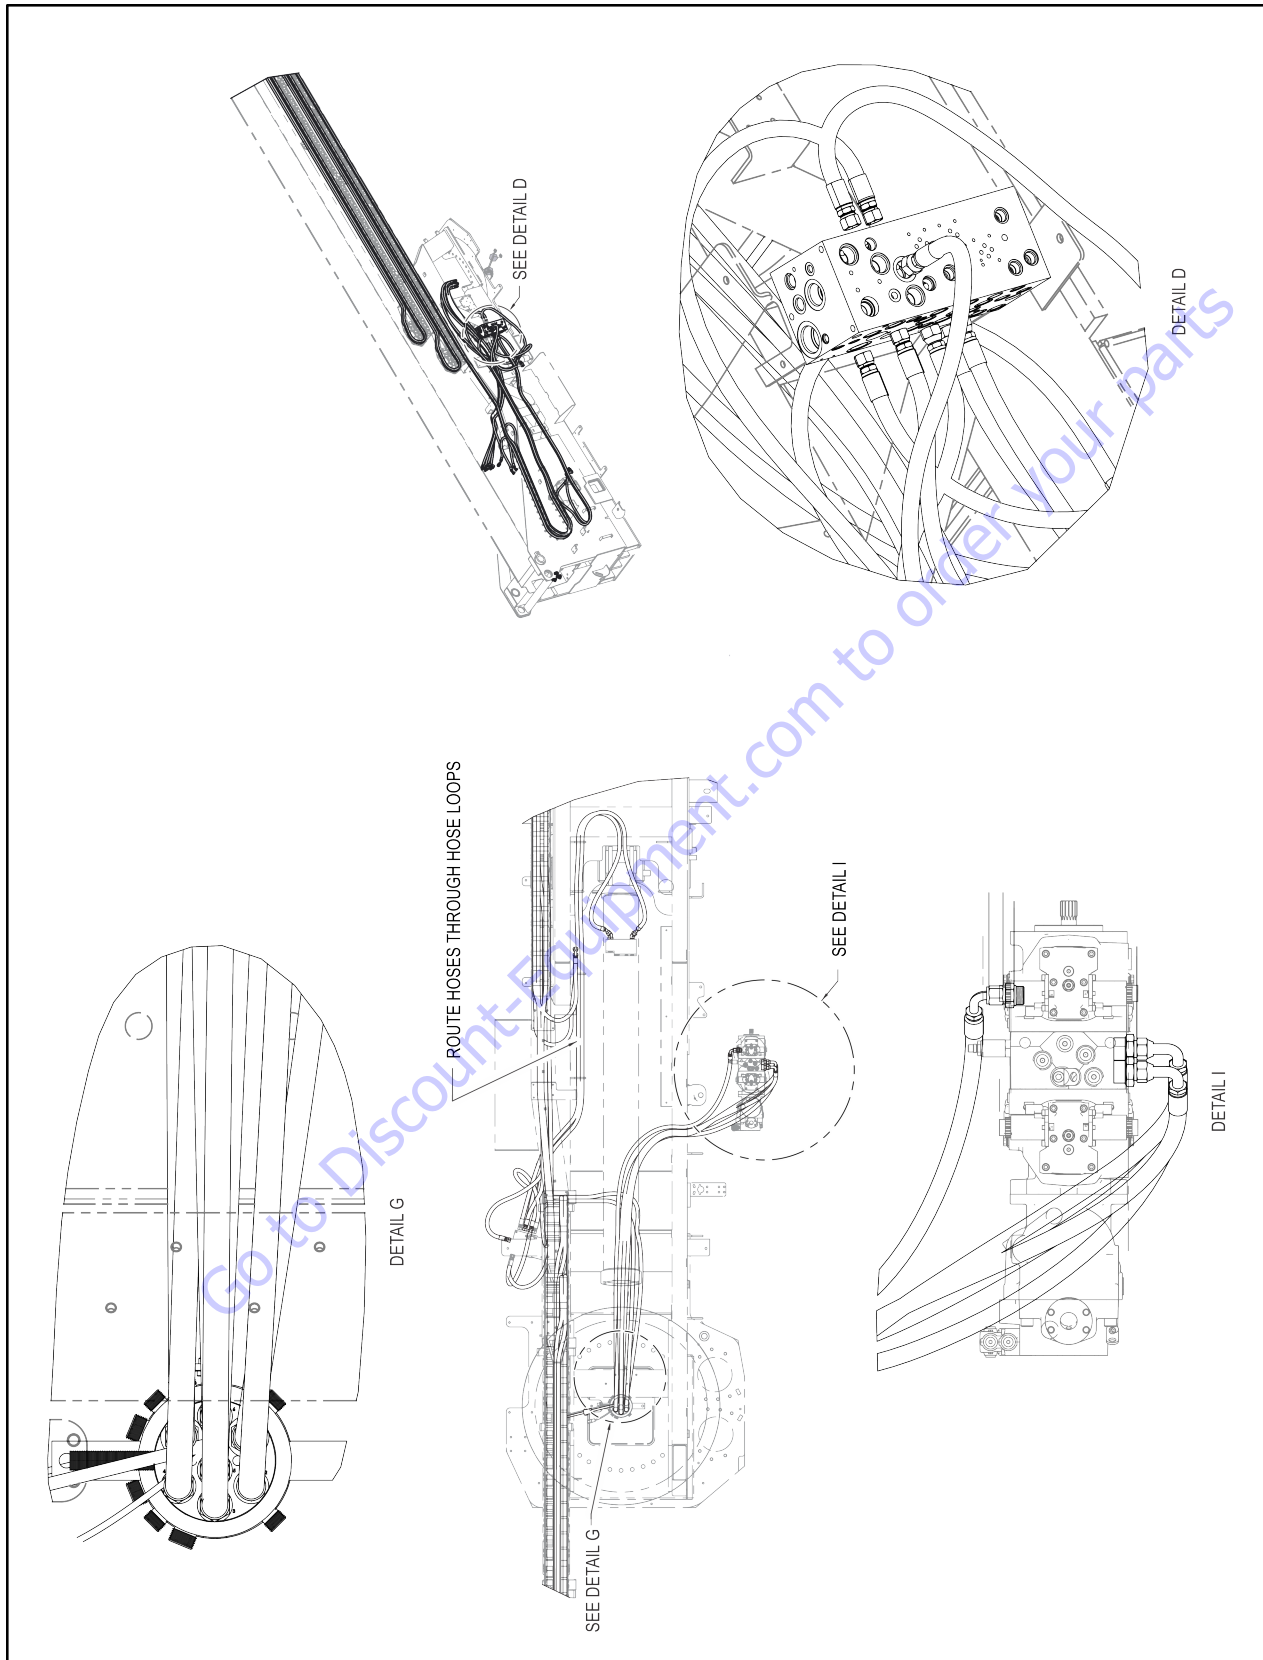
Hydraulic Hose Installation - Sheet 2 of 8
